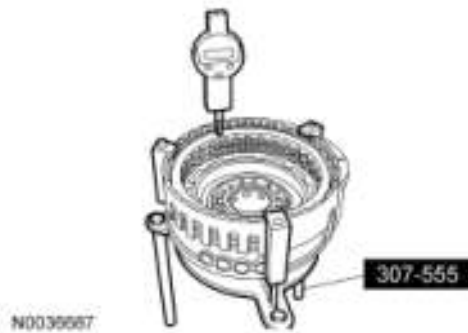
Installing Intermediate Clutch Assembly Into Special Tool (307-555)
